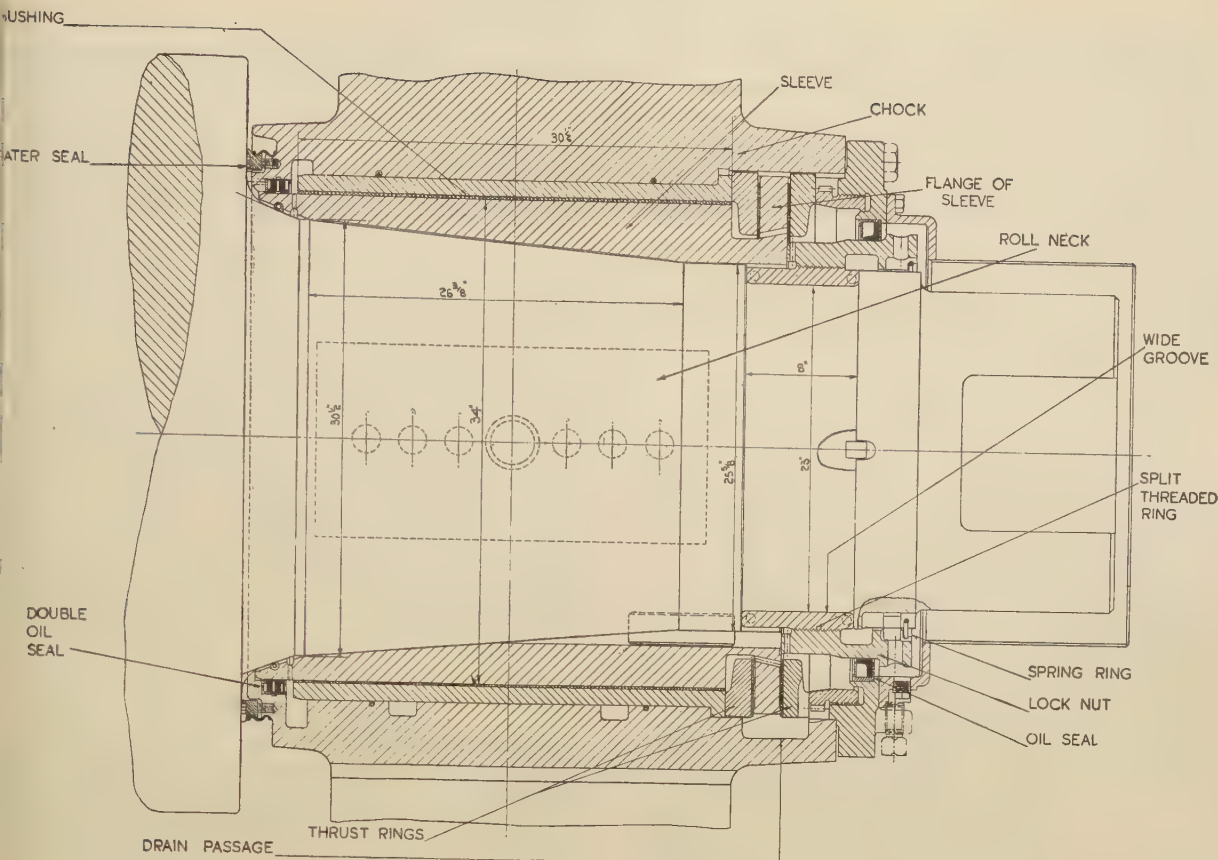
Cross-section of typical Morgan roll-neck bearing
